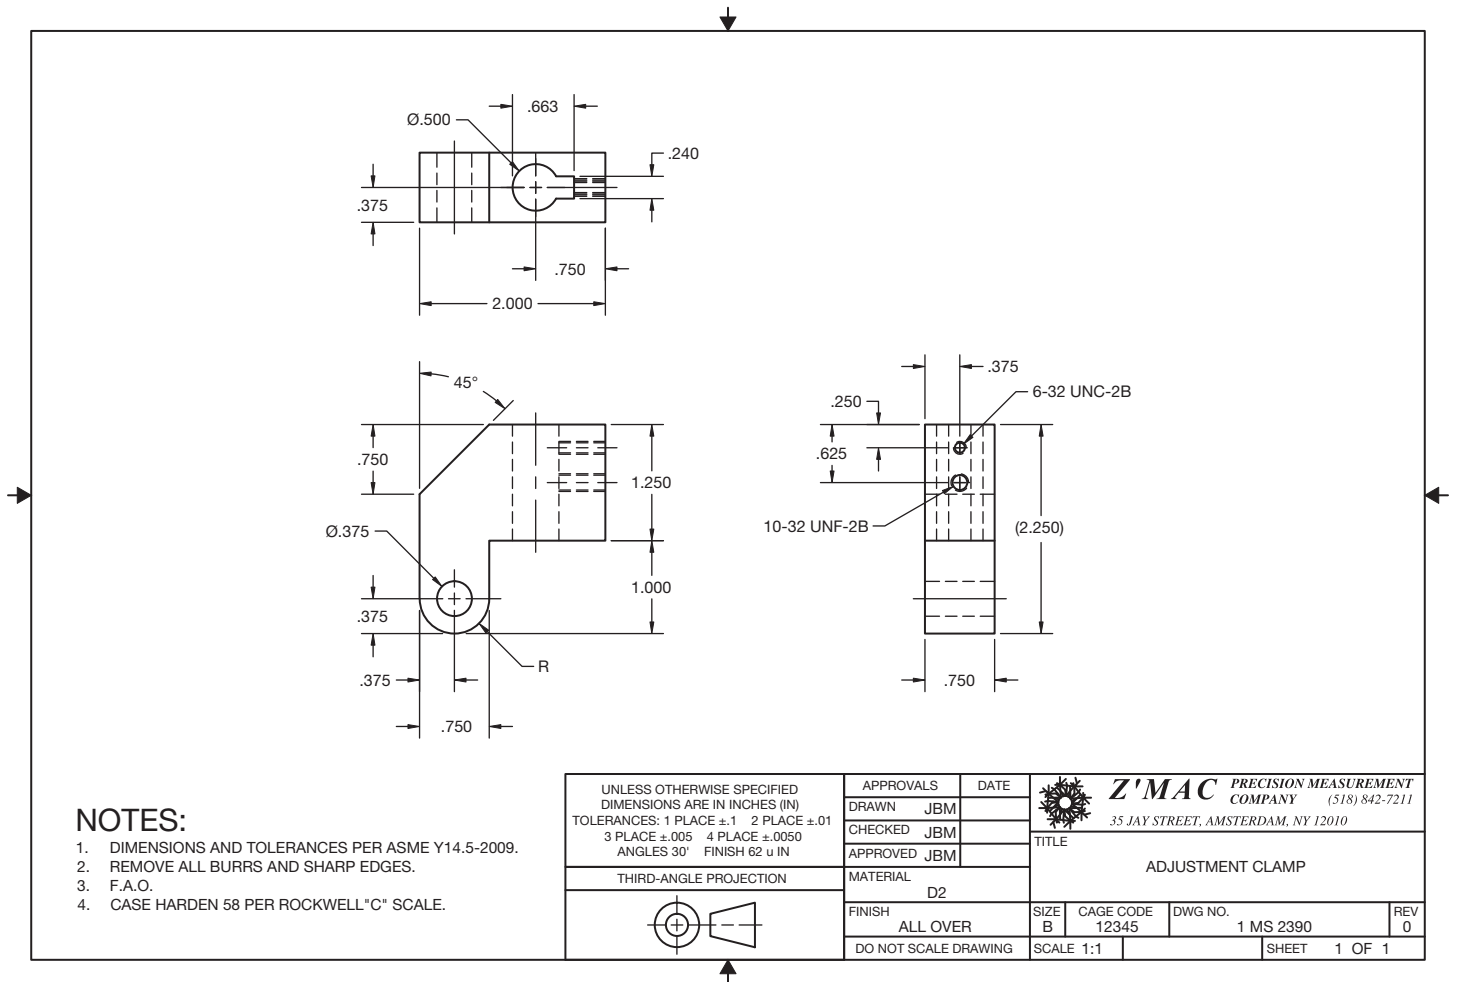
An actual industry drawing with three views used to describe the part. Courtesy Jim B. MacDonald
